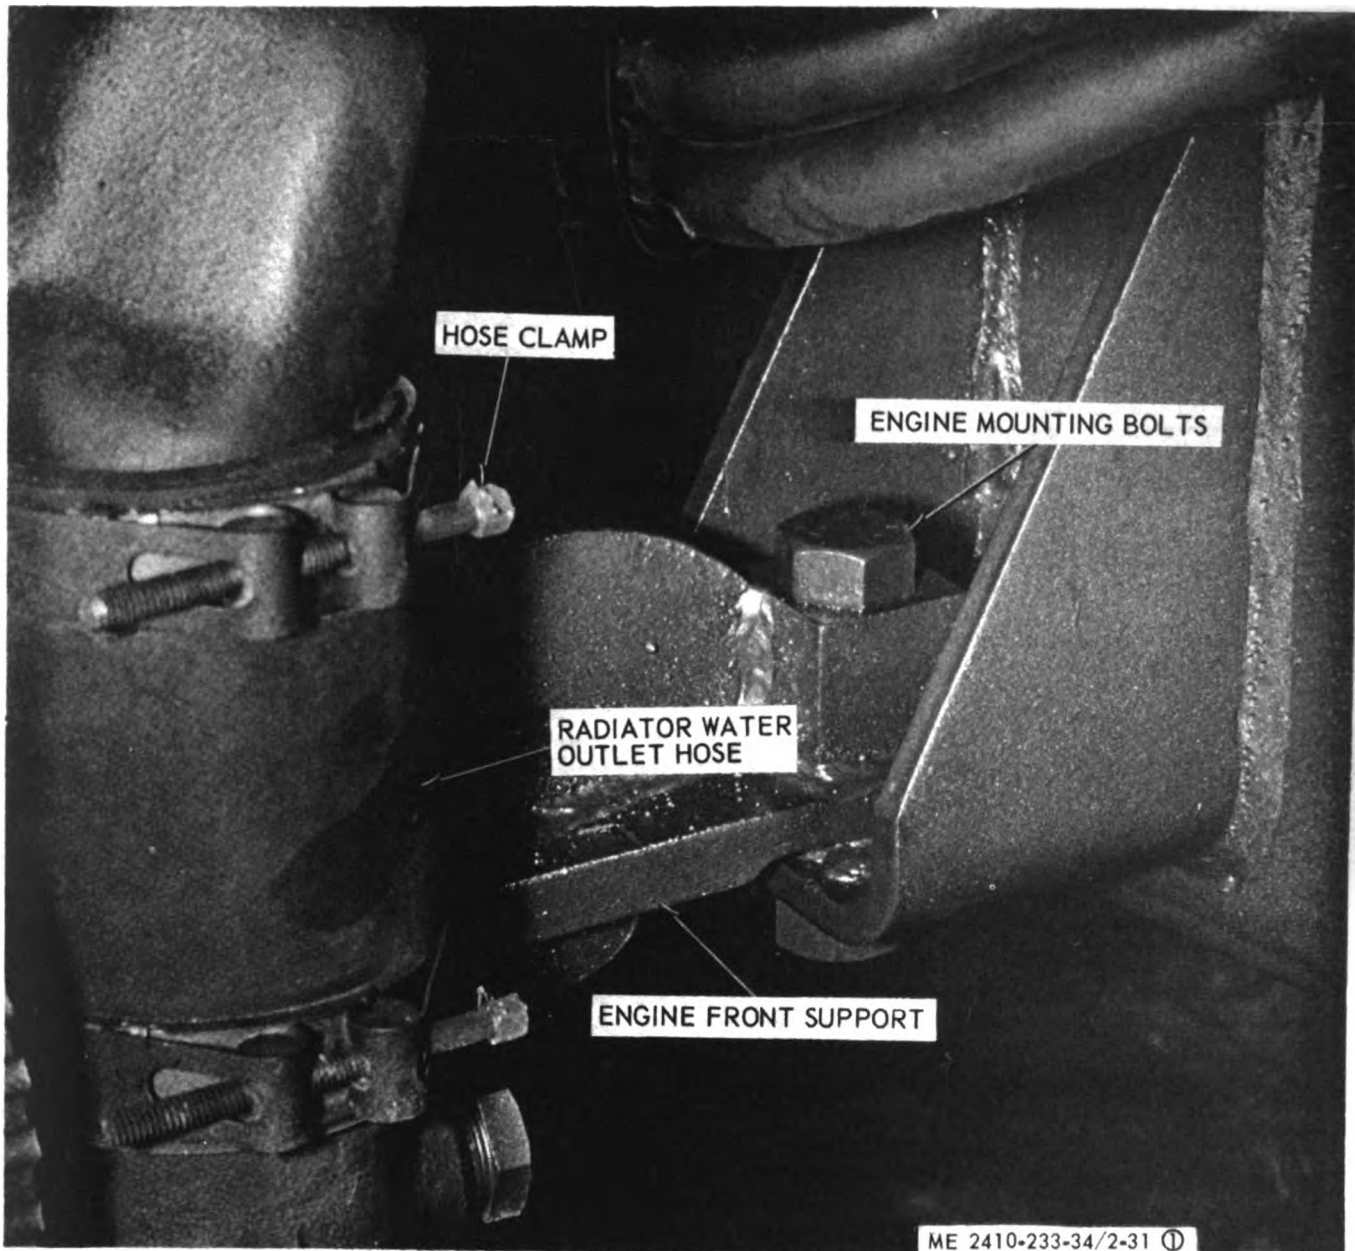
Preparing to remove engine (sheet 1 of 6).
